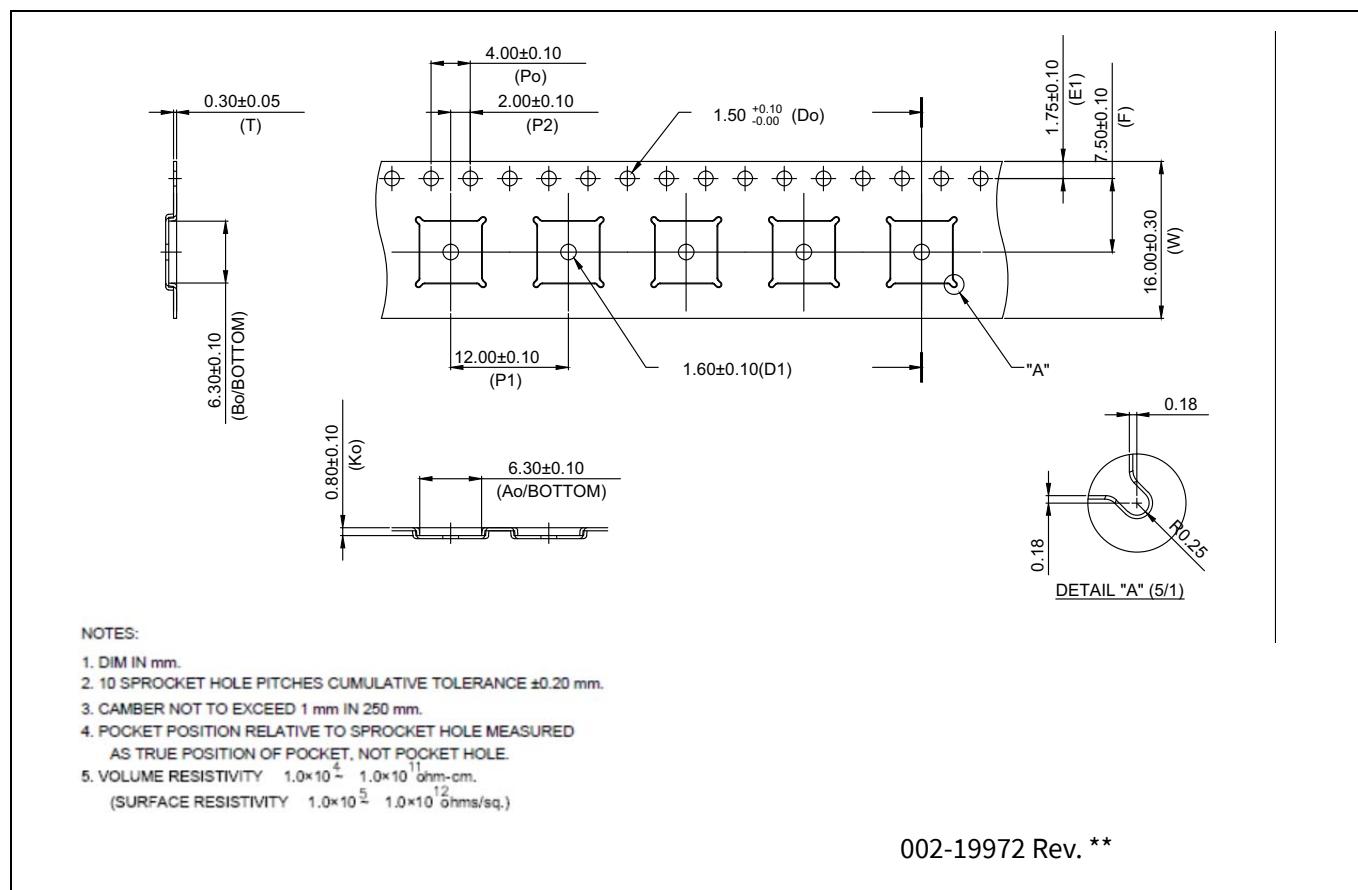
Carrier Tape, QFN0606 (HWA SHU), 002-19972
